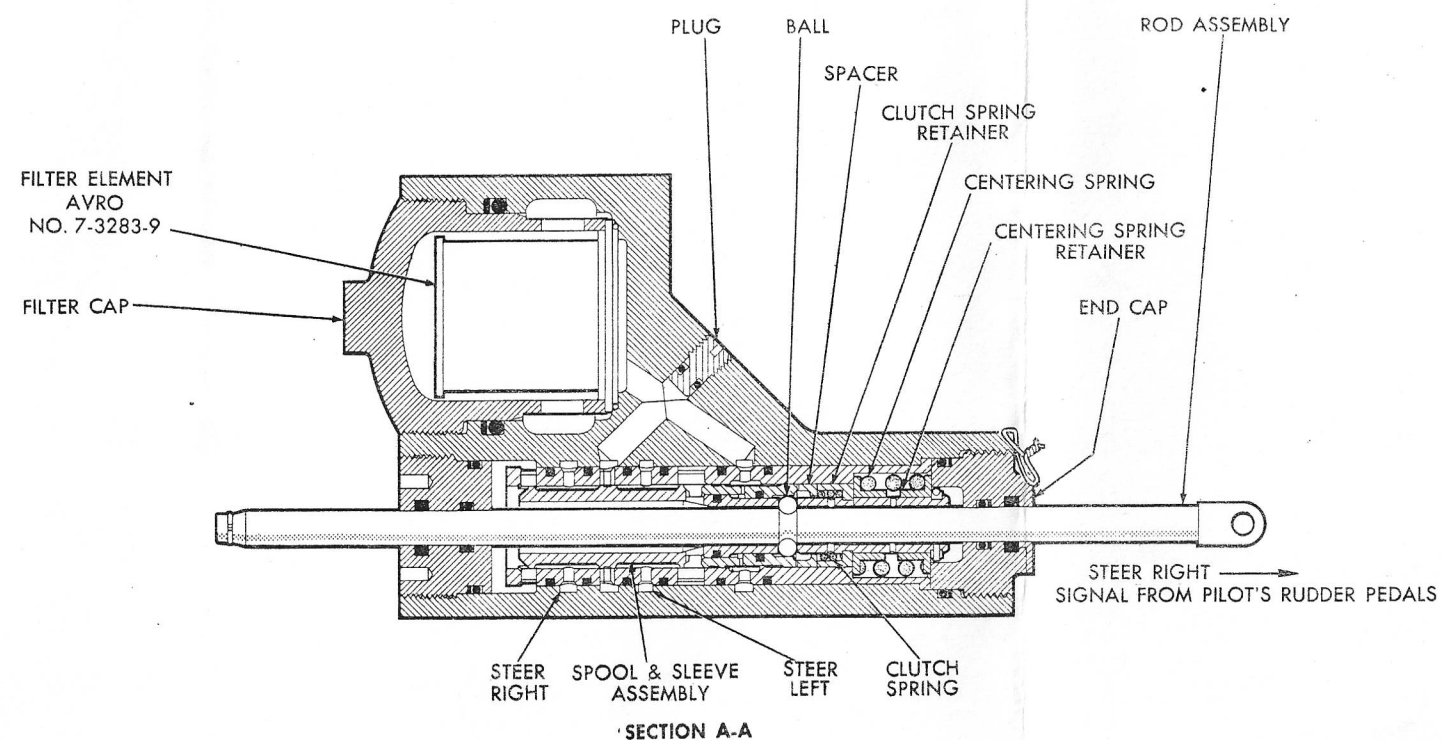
NOSE WHEEL STEERING CONTROL VALVE
